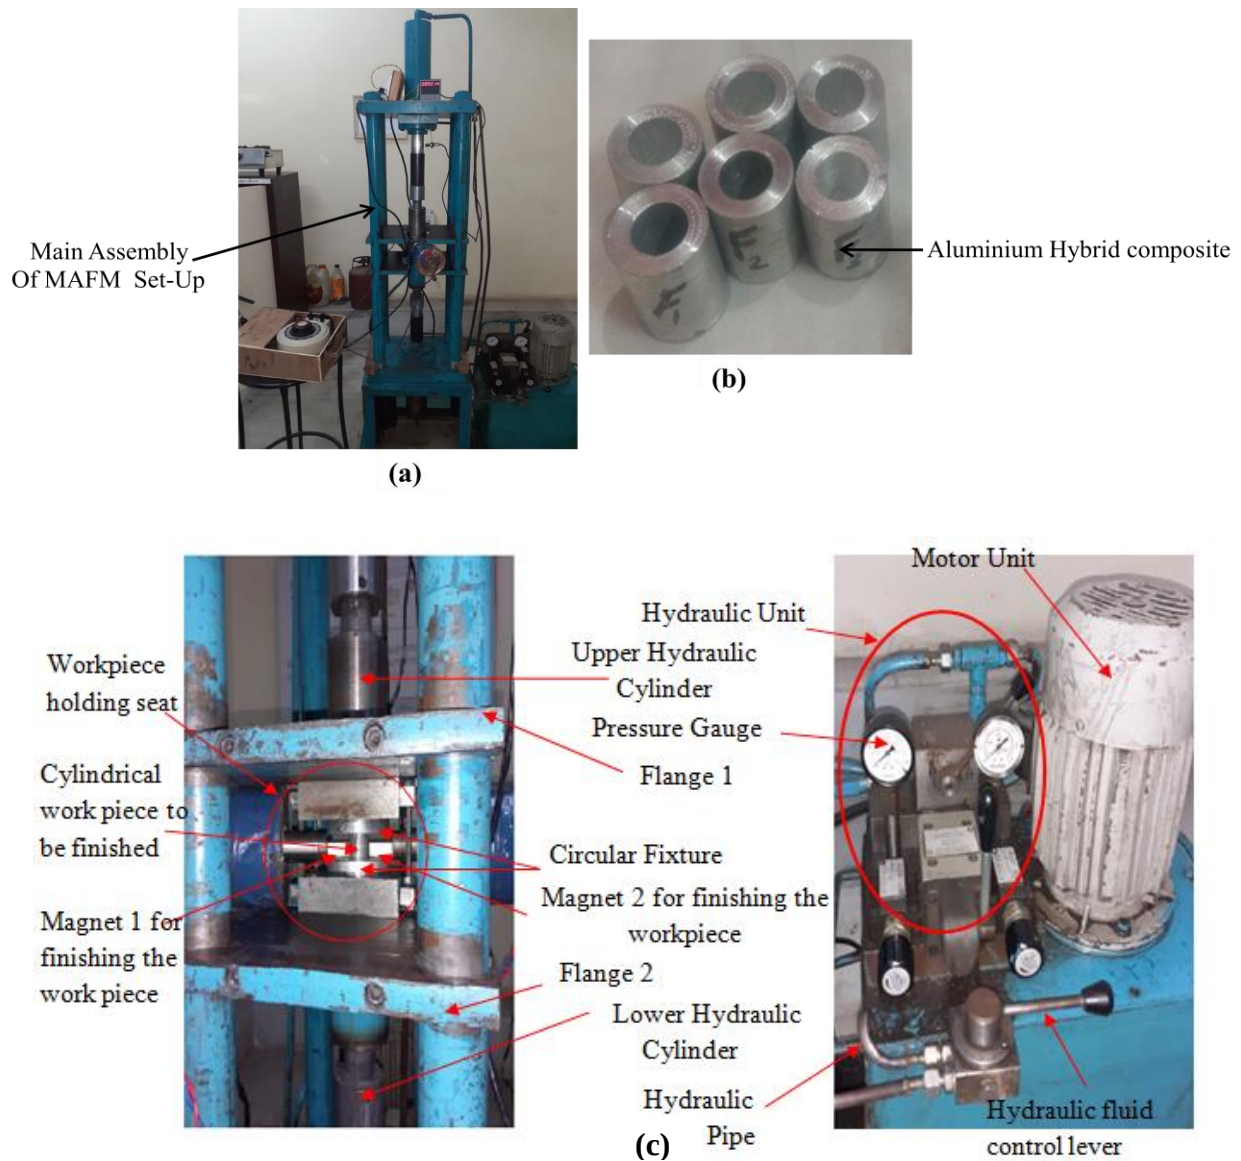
(a) Magnetic Abrasive Finishing Process Set-Up (b) Aluminium Hybrid Composites
